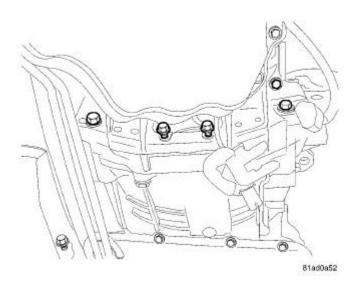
BELL HOUSING BOLTS Courtesy of CHRYSLER LLC
